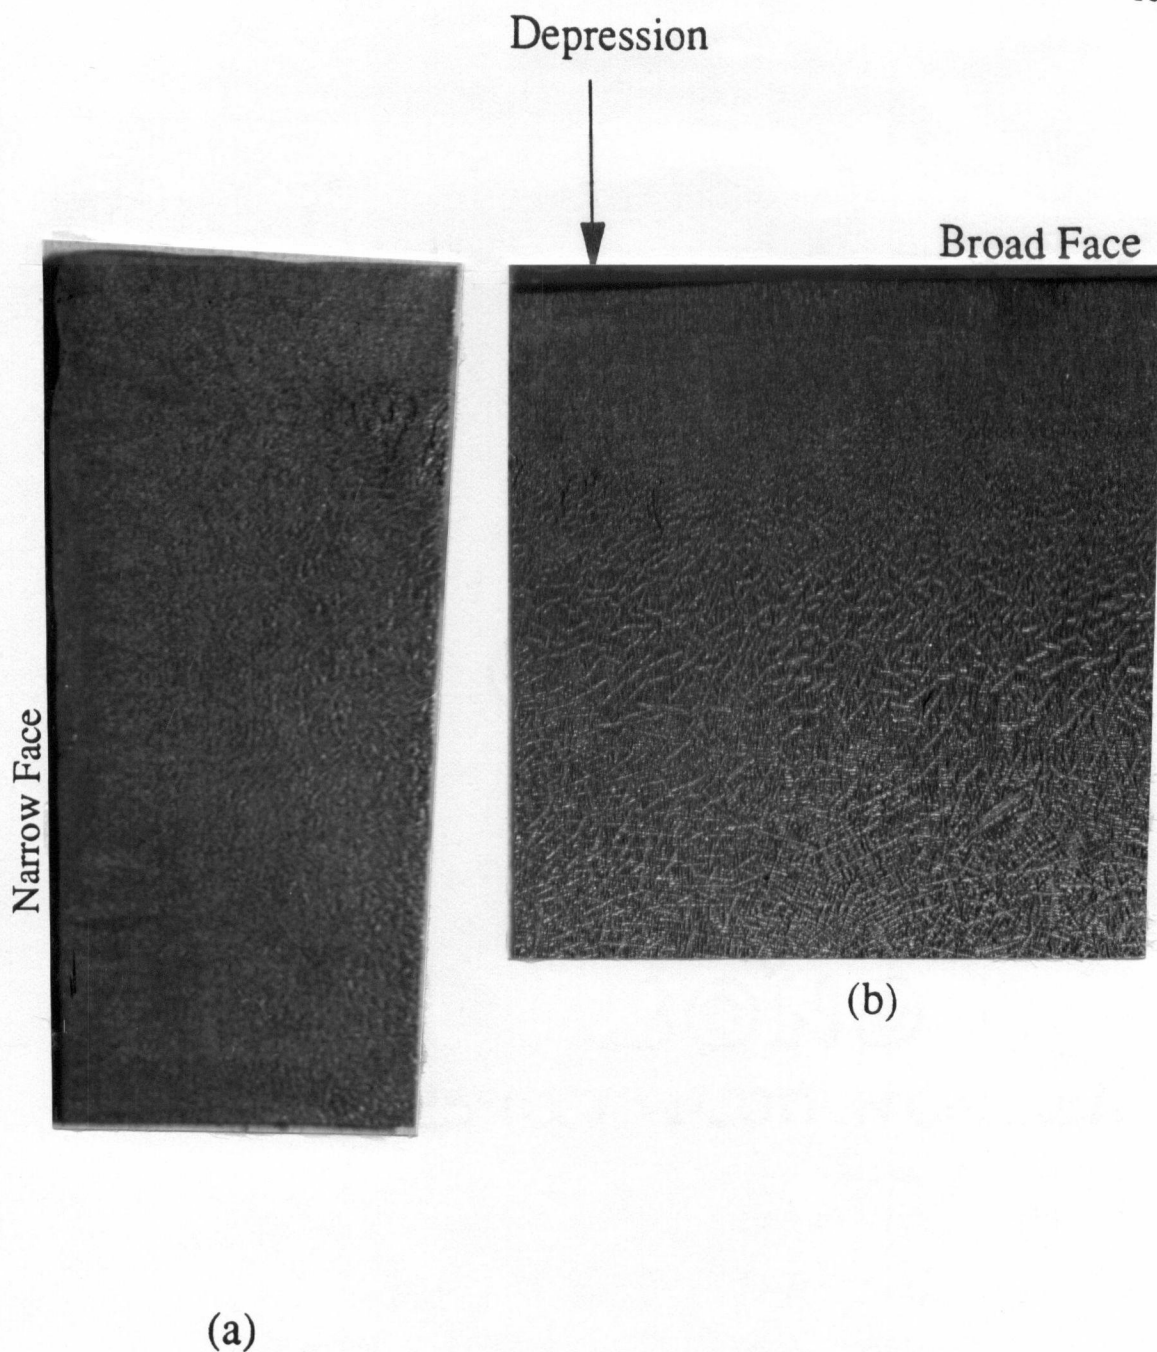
Macrographs of transverse sections of (a) sample cut near the narrow face showing longitudinal corner cracks, Mag. 0.8X (b) sample from the off-corner region of the broad face showing a depression on the surface, Mag. 1.1X ( $C=0.29\%$ , casting speed= $0.75$  m/min).
